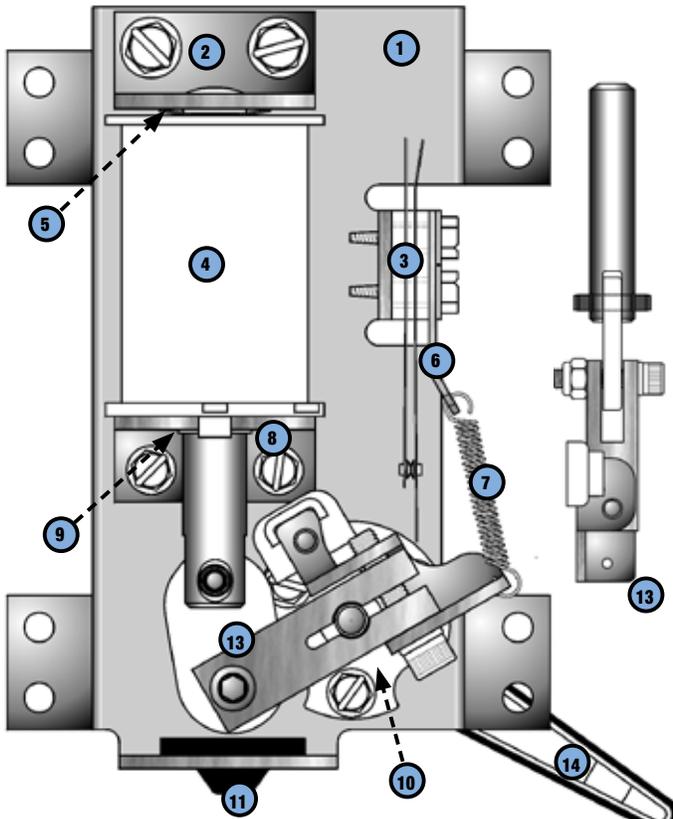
Left flipper assembly 500-6543-02-ND bottom view.
